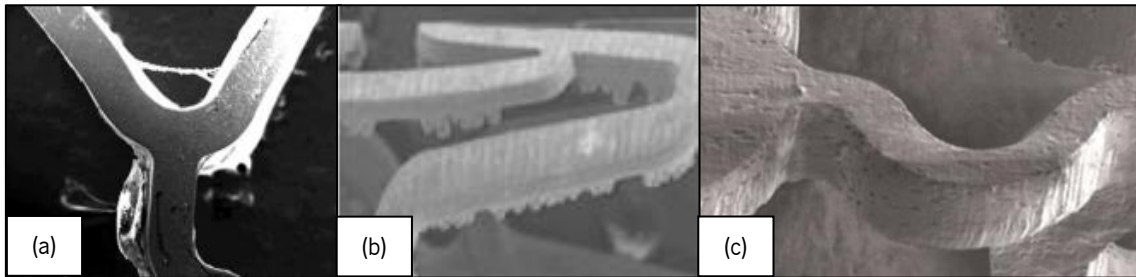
Principal defects of laser cutting: (a) deformations; (b) burrs; and (c) porosities (adapted from [15, 184, 185]).
